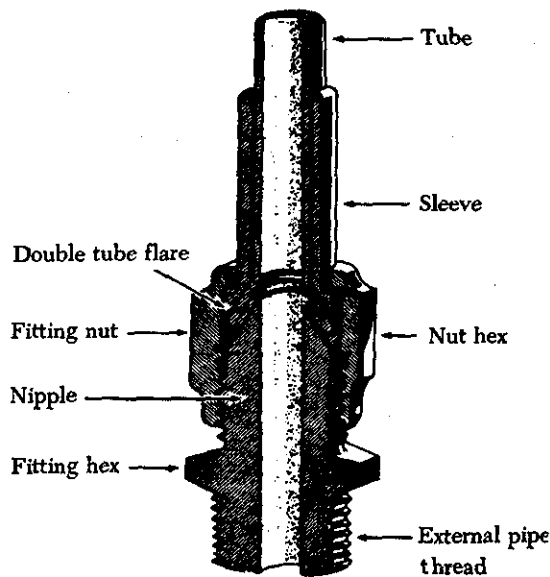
Sectional view of a typical oxygen system fitting.
